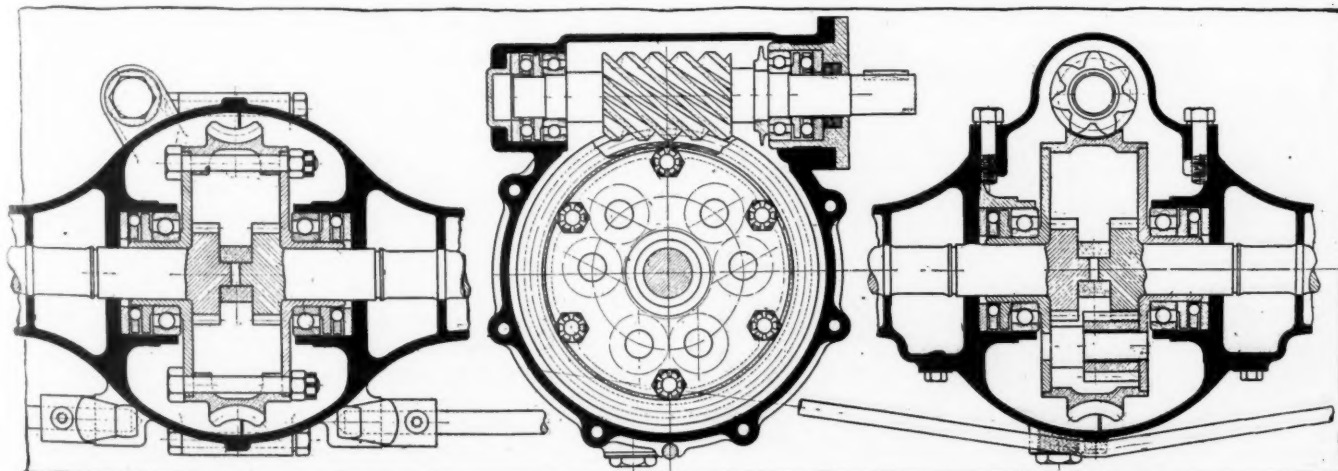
Belsize worm drive, showing ball-bearing mountings for worm and gear. Left and right views show end and center shows side view
